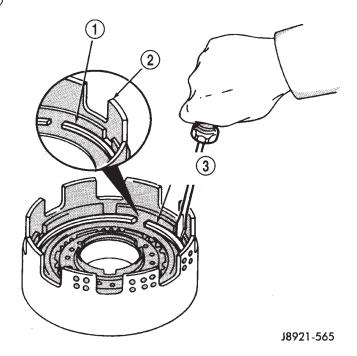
Adjusting Clutch Pack Snap Ring Position
